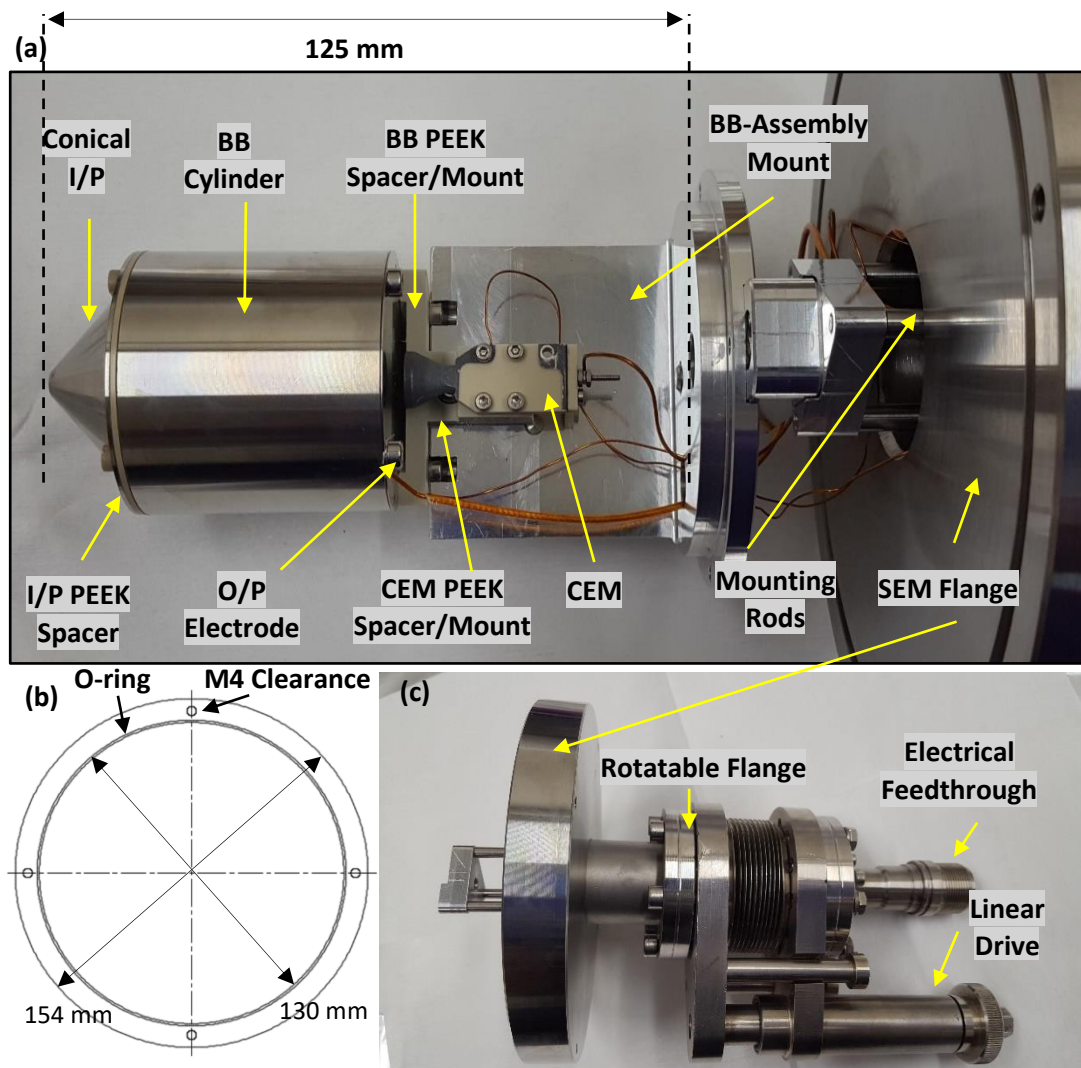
(a) BB assembly with modified mounts, a compact channeltron from Sjuts and a bespoke mounting flange for JEOL 7000F SEM (b) CAD drawing of the SEM mounting flange (c) SEM flange interfaced with linear drive and electrical feedthroughs.
